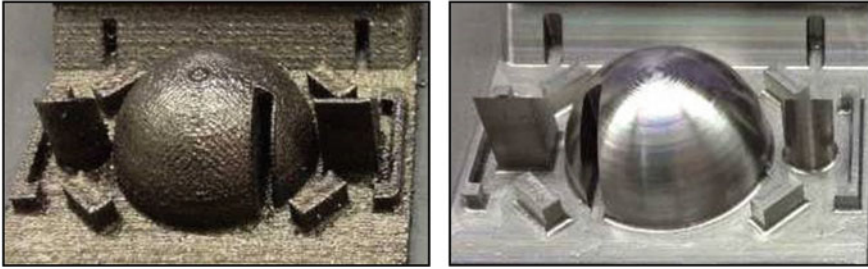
AM mould insert—after PBF-LB/M process (left) and after HSC machining (right) (Courtesy of Matsuura)
